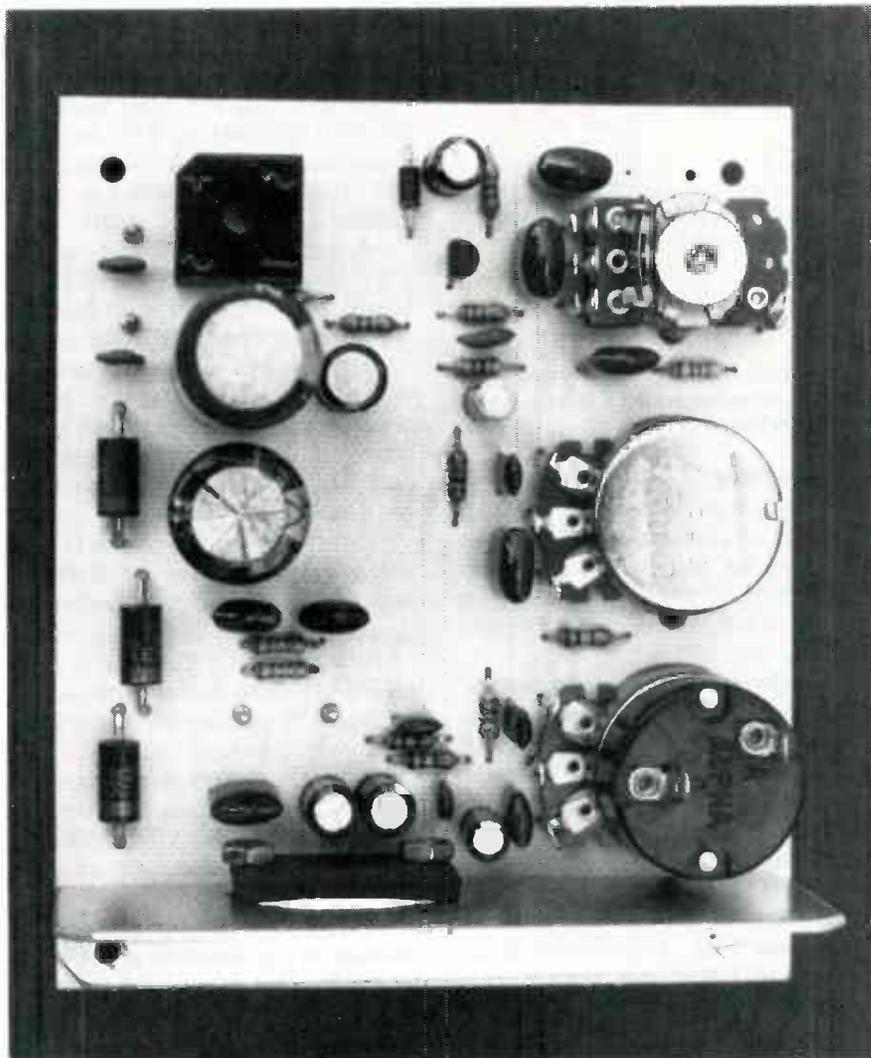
YOUR BOARD SHOULD look similar to this one when it is completed.
